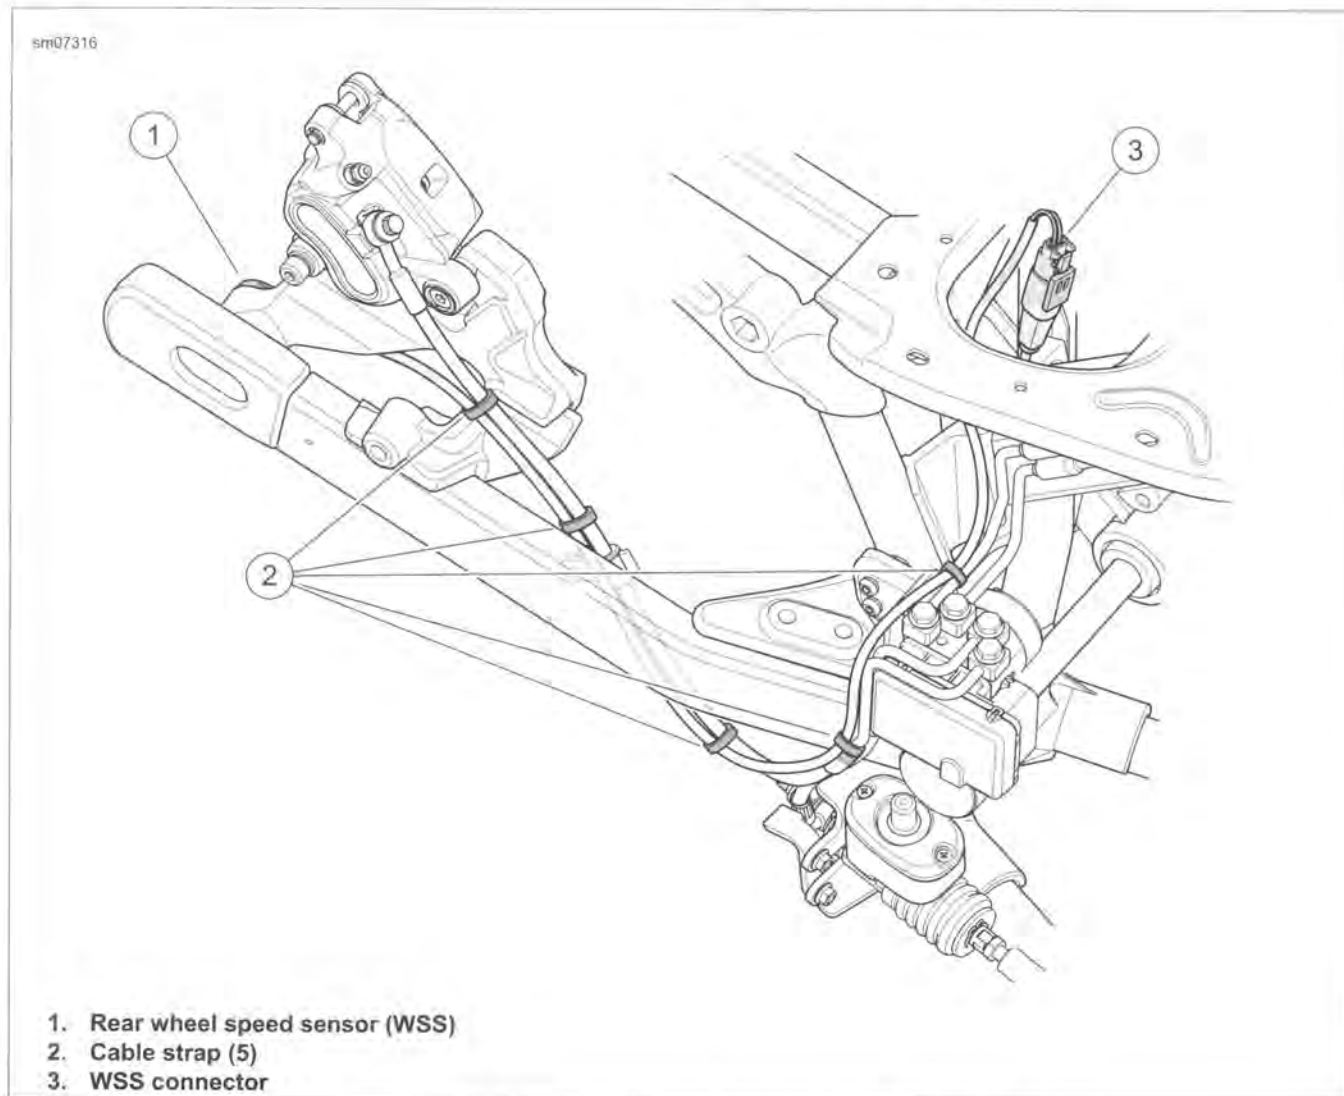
Rear Wheel Speed Sensor and Cable Routing
